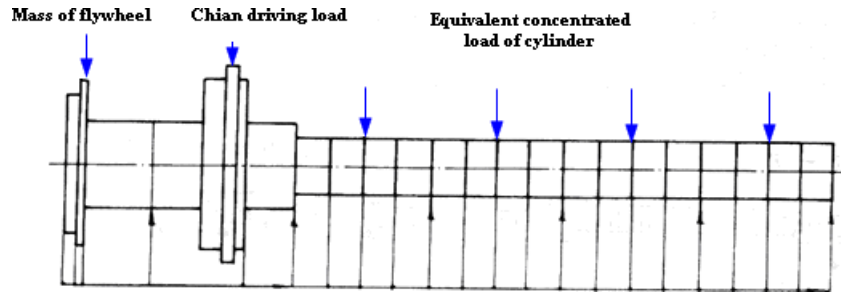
Calculation Model for Crankshaft Alignment
